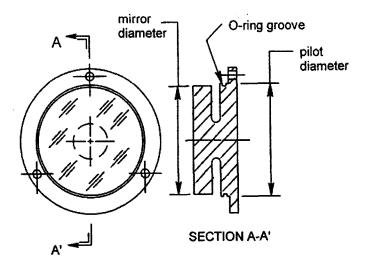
A small metallic mirror with optical and mechanical interfaces cut without removing the part from the SPDT machine. (Adapted from Addis.²¹)
